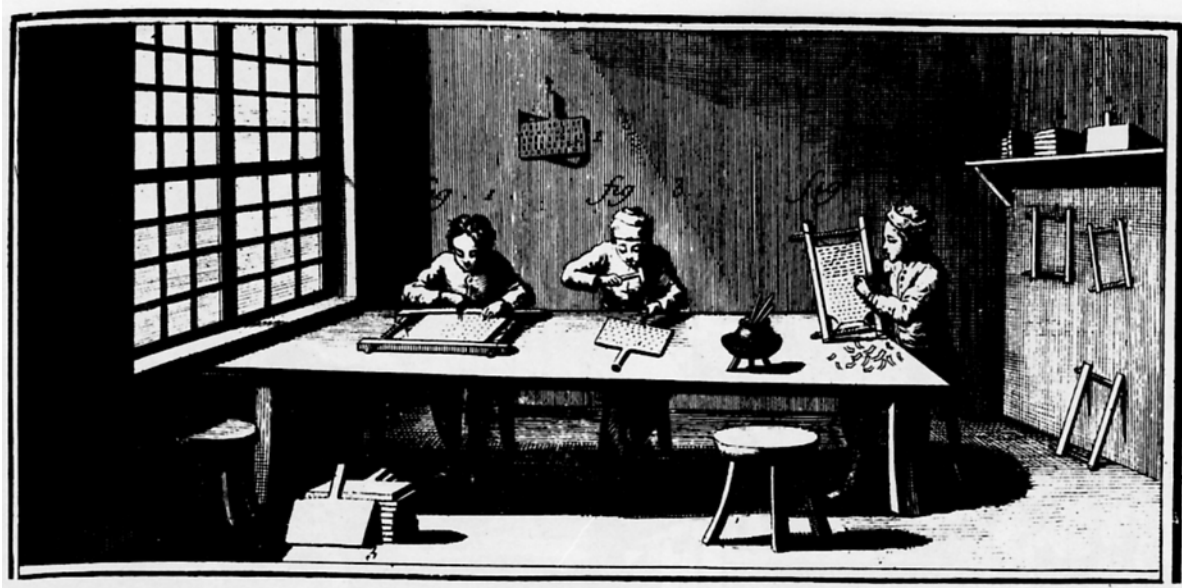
Card Making. Cards used to prepare short fibers, such as cotton or wool, were made by embedding wire teeth into pieces of leather which, in turn, were mounted onto paddlelike pieces of wood. American card makers used a technique similar to that shown in this French engraving. From the *Diderot Encyclopaedia*, 1763. (Smithsonian photo 43995-B.)
